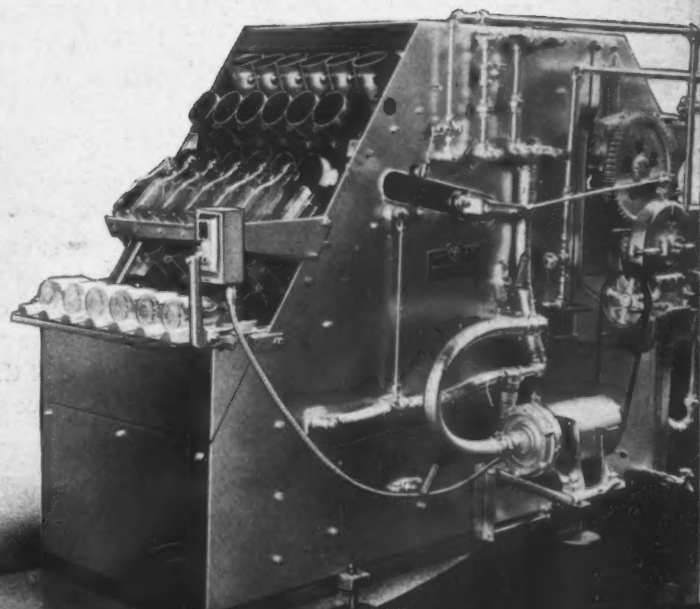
Electronic inspection machine automatically sizes piece and tests hardness
